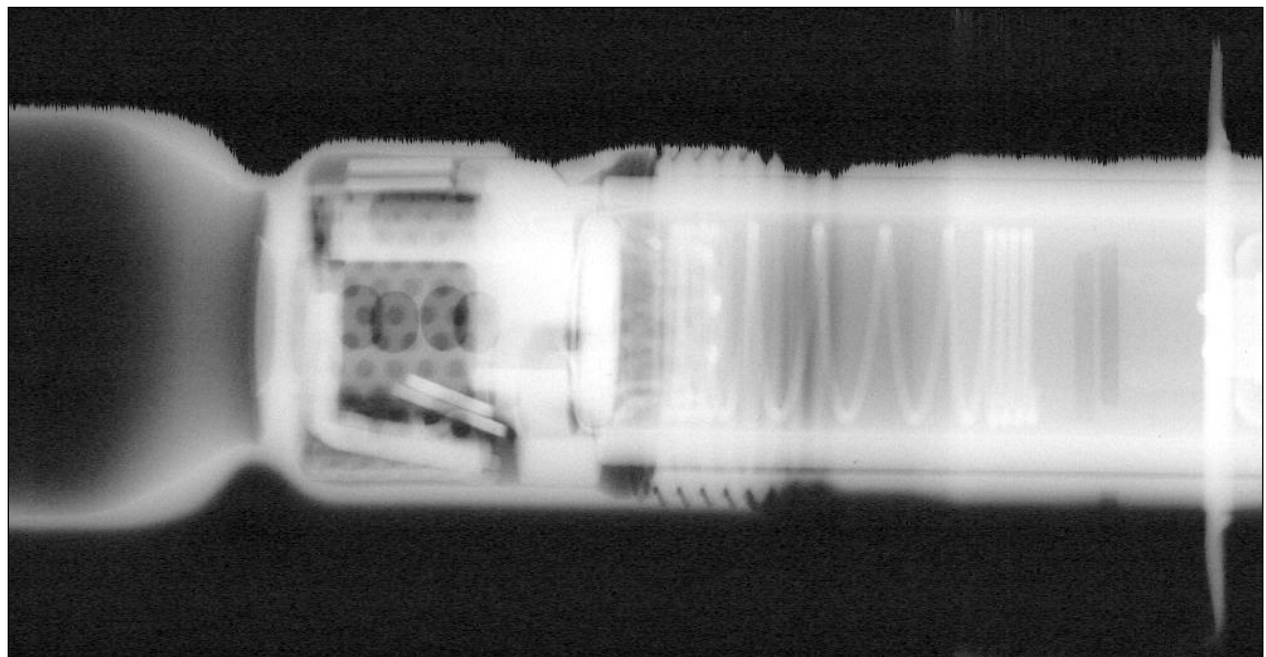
radiography of an ignited hybrid inflator; on the left side, cold gas cylinder with opening mechanism (perforated plate) and on the right side, the pyrotechnic part with squib.
